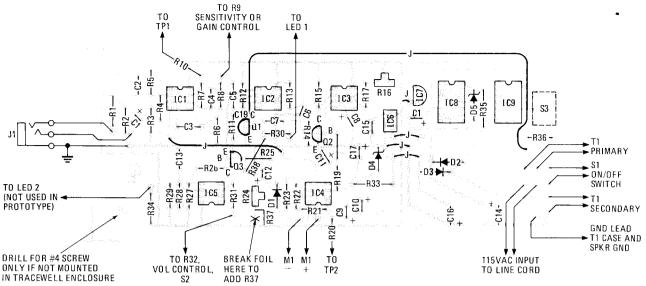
HOW PARTS ARE PLACED on the PC board. Note pads that are used for making connections to meter and other parts that are not mounted directly on the board.
